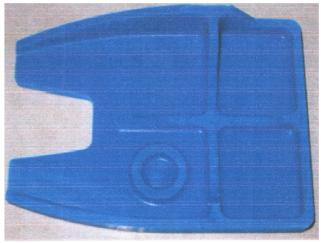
Fish-head prototype pattern for the vacuum casting mold
